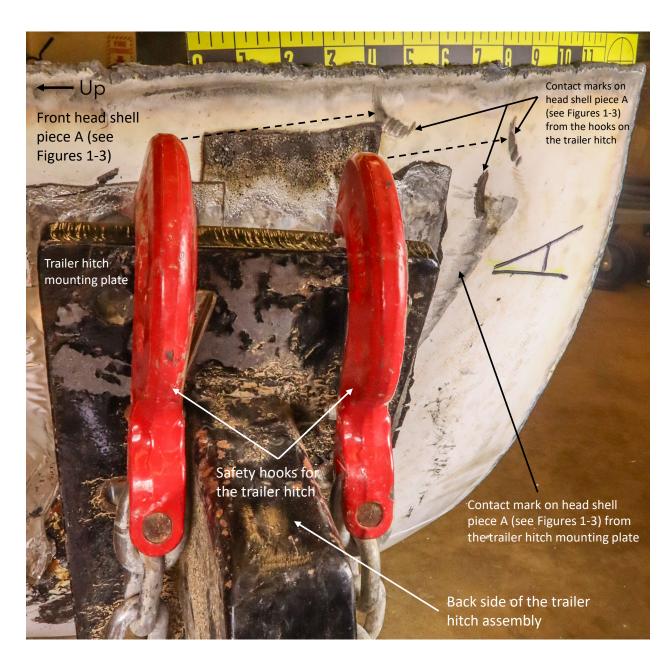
View of the exterior side of the front head shell piece with the trail hitch placed in close proximity. Several contact or witness marks are identified consistent with the trailer hitch mounting plate and hooks contacting the exterior side of the front head shell.
